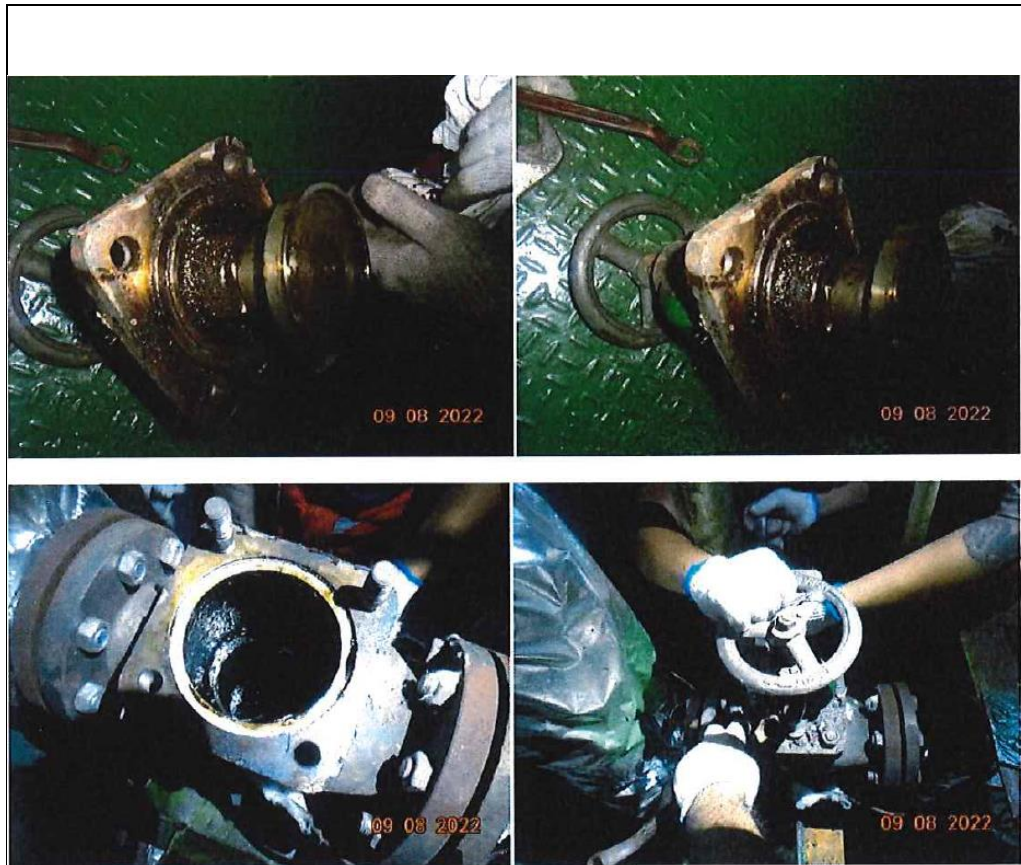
Inspection of *the valve* (NQV-25) showed that the type of *the valve* was not according to the approved drawing
